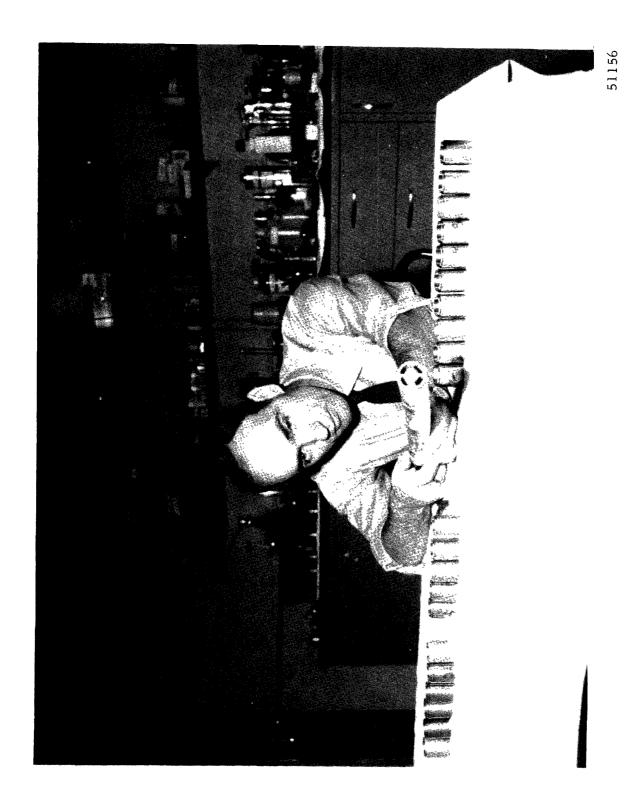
SPECIMENS BEING ASSEMBLED TO FORM CORROSION PROBE The air exit vents are visible at the hot end of the probe.
